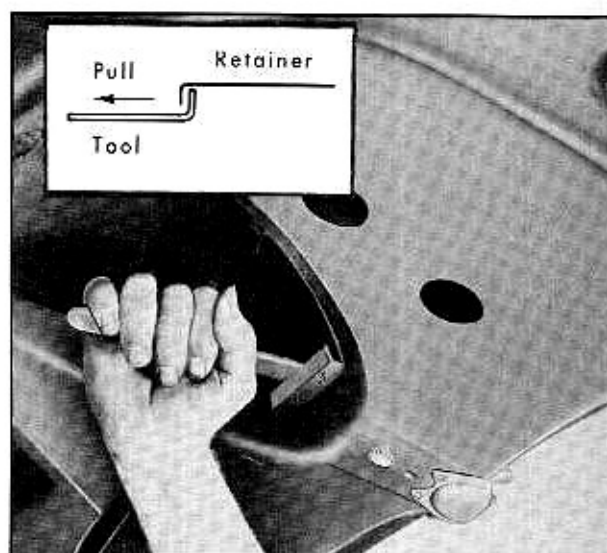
Removing Deck Lid Lock Cylinder Retainer
